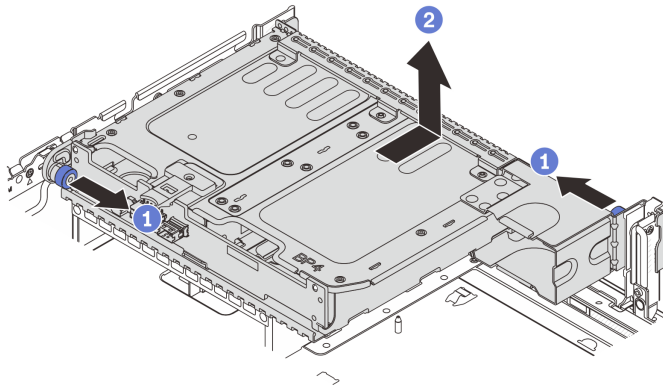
Removing the 2 x 3.5-inch rear drive cage
